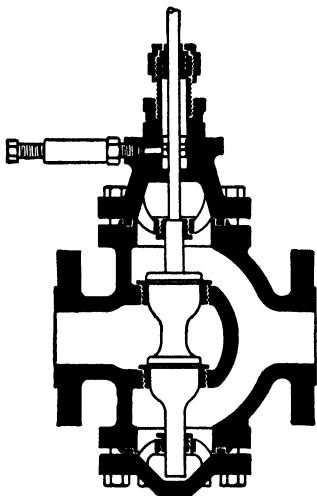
Ratio-plug double-seat valve with lower guide.
